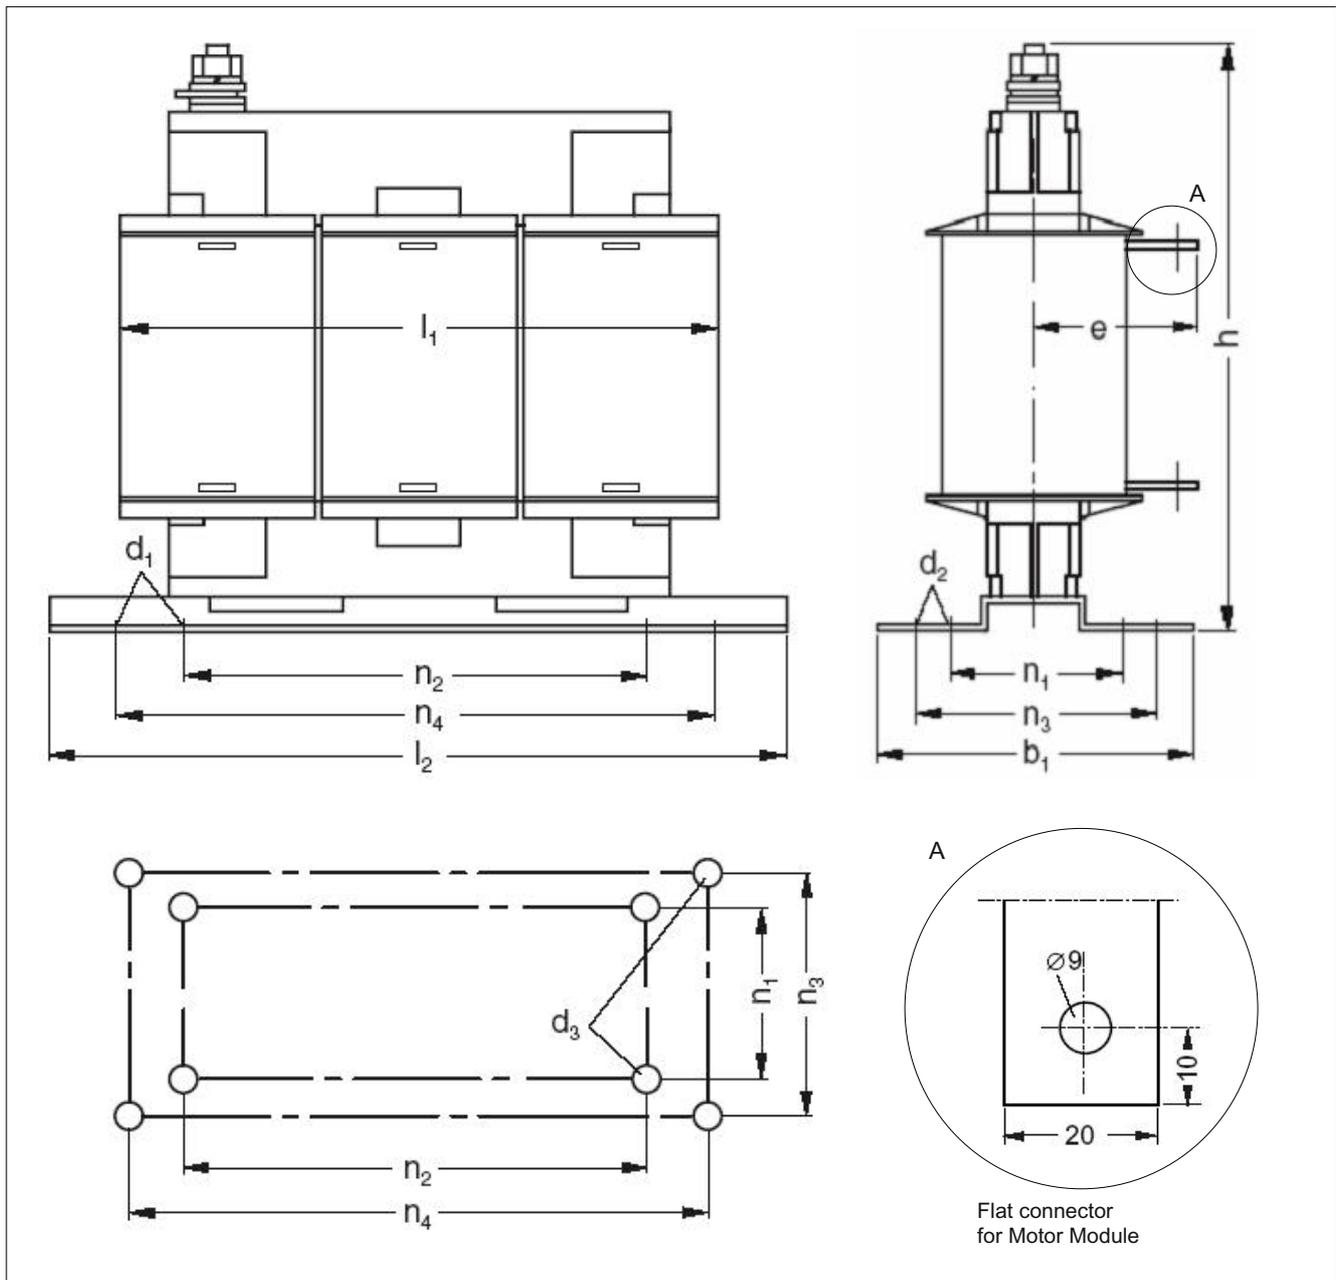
Dimension drawing and mounting hole of motor reactor 60 A (6SL3000-2BE26-0AA0)
